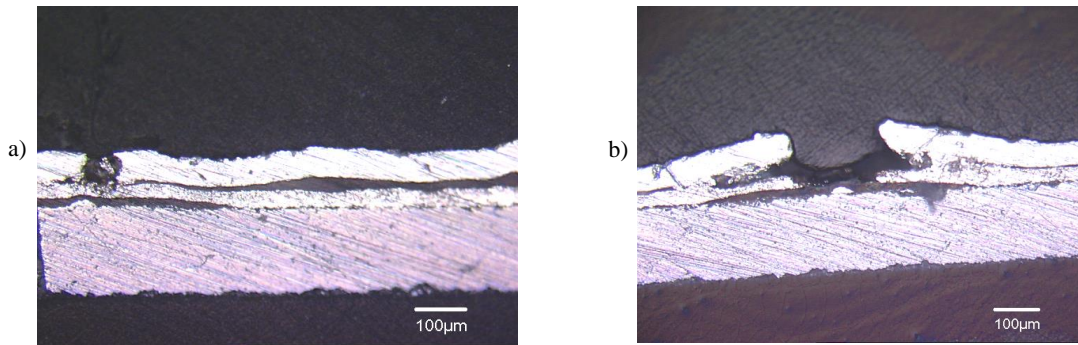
Module structure a) Small weld spot b) Large weld spot
